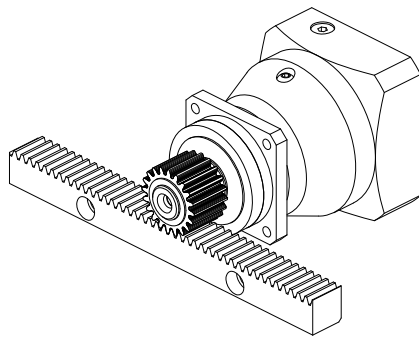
Recommendation for bearing assignment S (e.g. for straight-cut gearing)
